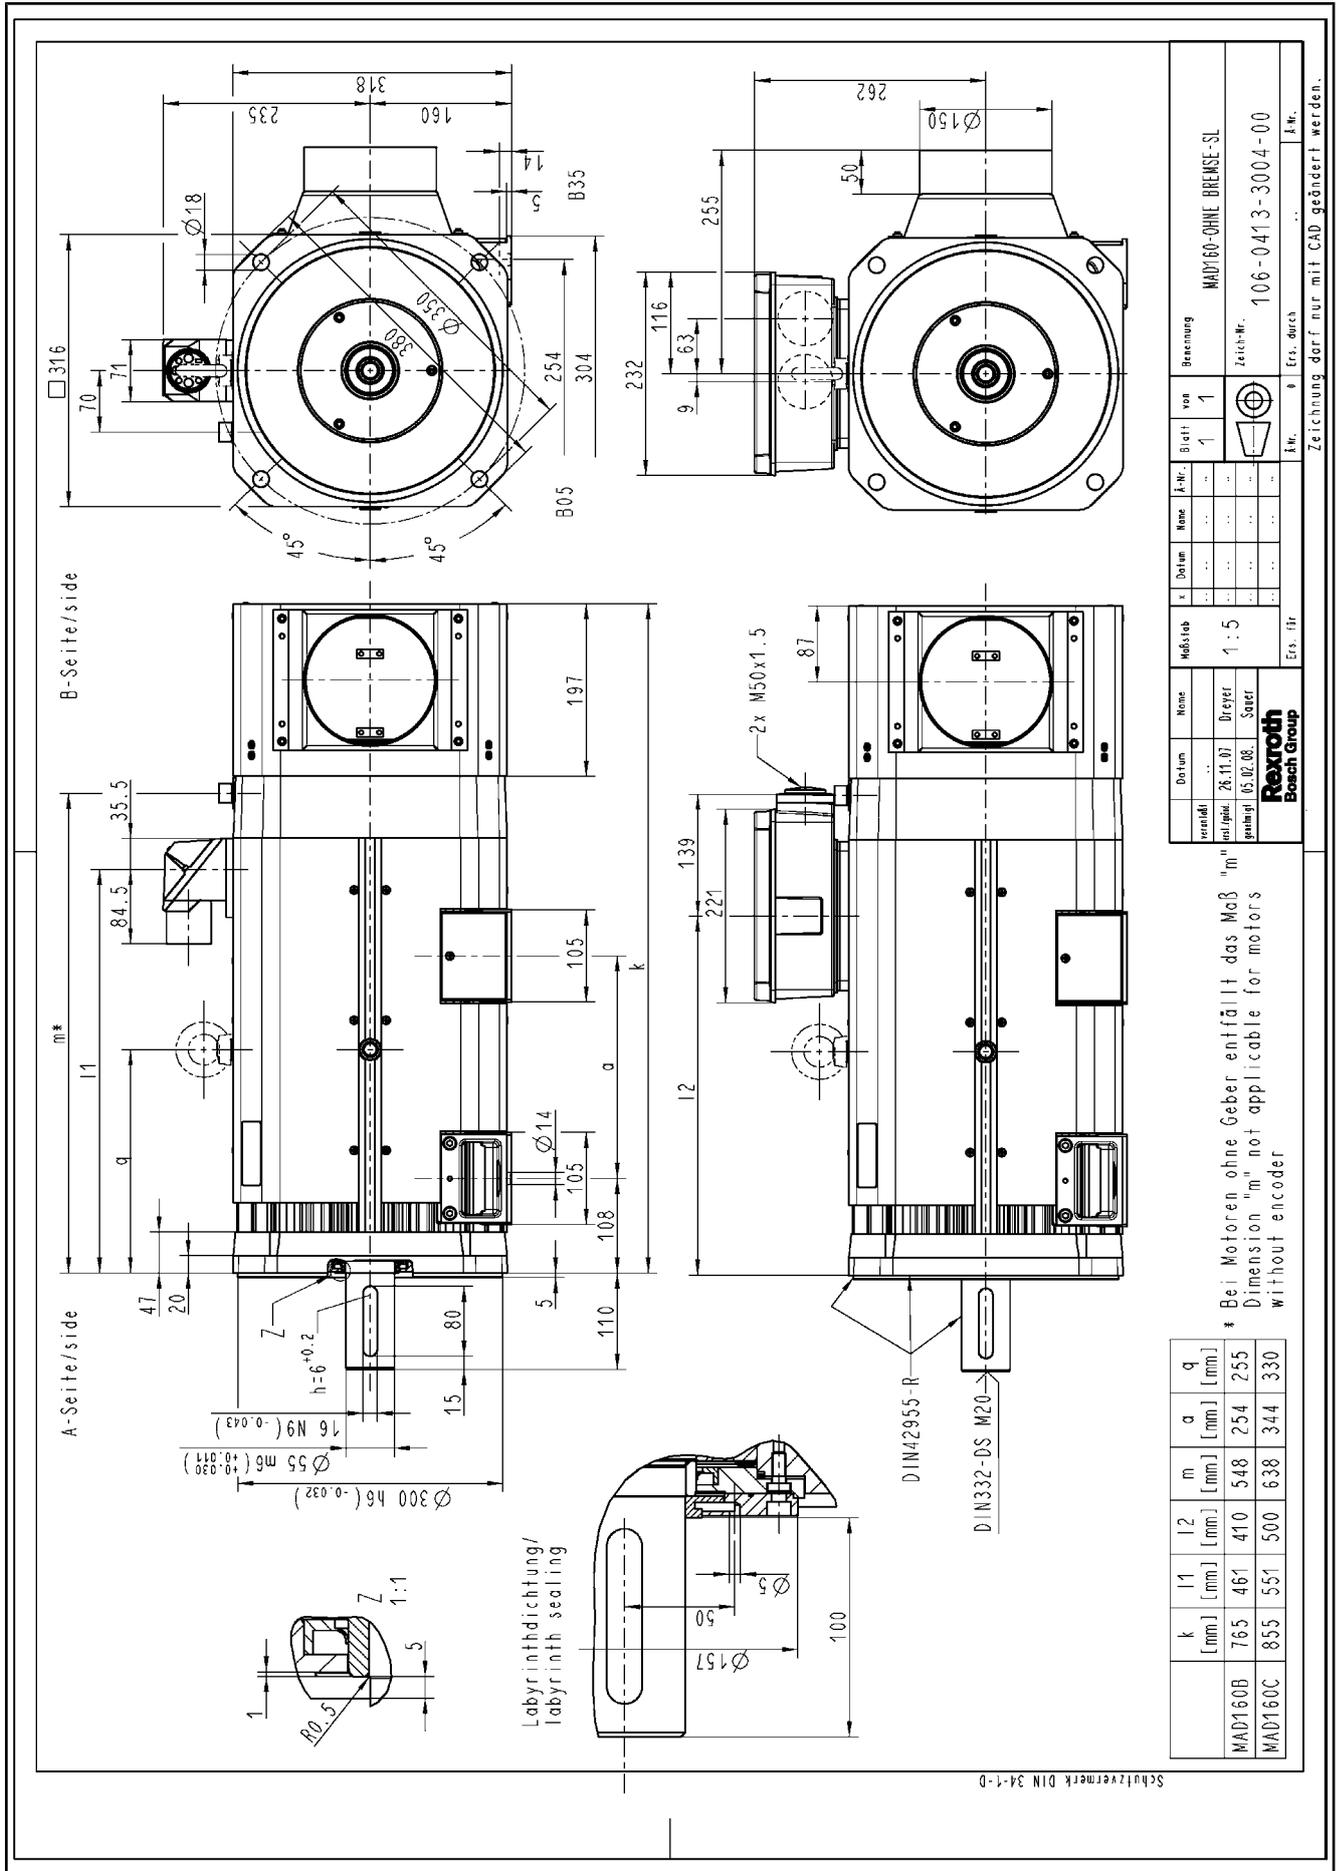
MAD160 with SL cooling, without brake (terminal box rotatable)
